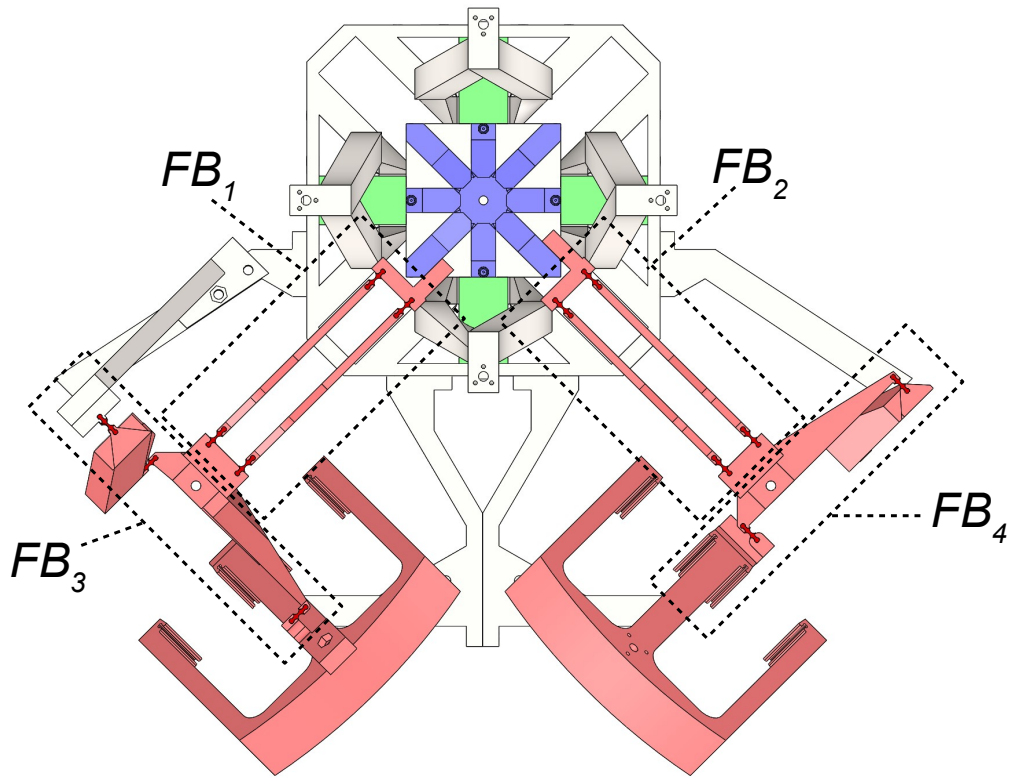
Top view on the direction setpoint mechanism of the final design.
